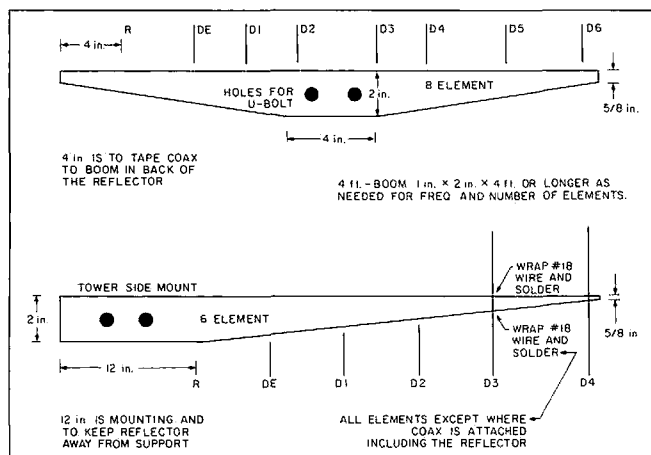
Boom dimensions and element locations. Although not required, you can taper the boom as shown to lighten the total weight of the antenna.
